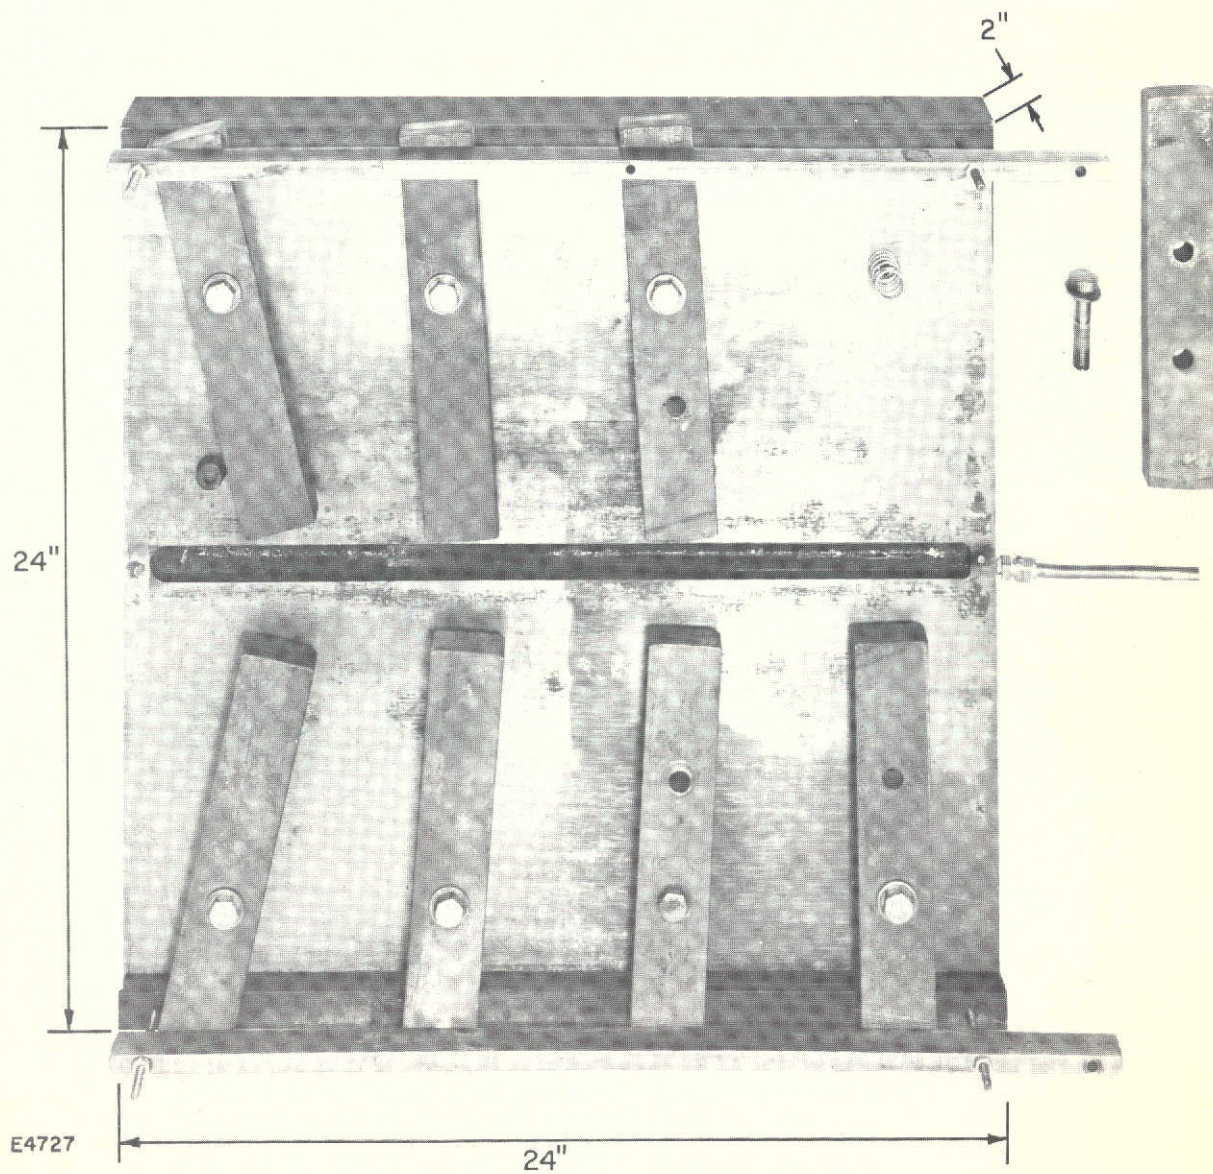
Photograph of Heavy Duty Welding Fixture Used to Secure
